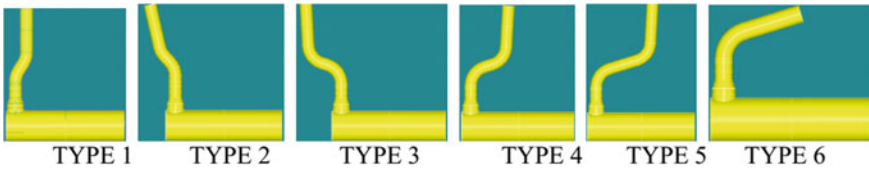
2.5 inch diameter outlet feeder pipes geometric types
